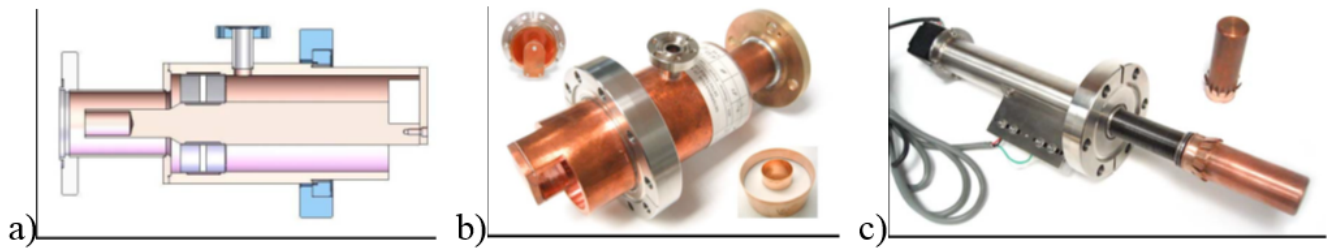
a) Principal design of the power coupler; b) Finished input power coupler; c) One of two tuners used on the buncher; Be-Cu contacts are welded to the removable copper fingers, hard stops and limit switches define the stroke, a linear actuator with captive shaft is used to operate the tuner.
